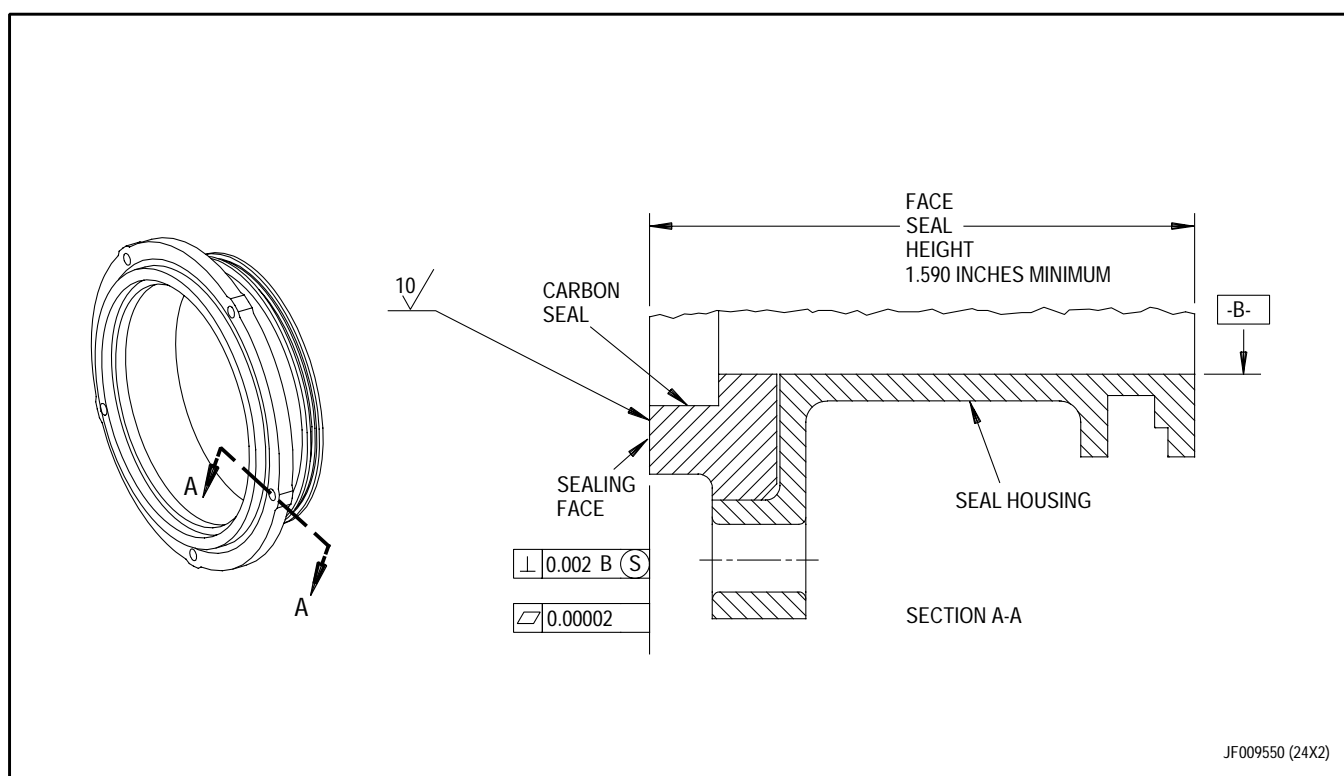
No. 1 Bearing Face Seal Assembly - Face Seal Element Lapping
